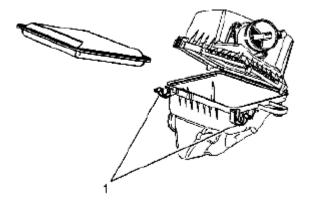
Identifying Air Cleaner Lower Half Clips Courtesy of SUZUKI OF AMERICA CORP.
